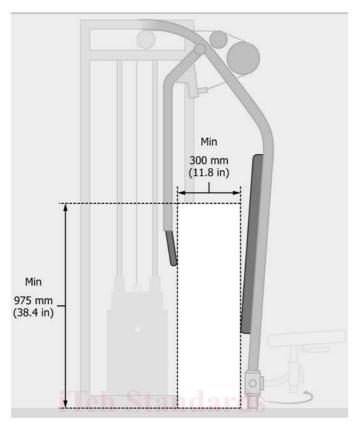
Minimum Distance from Back Support to Hand Grips with Seat Removed
